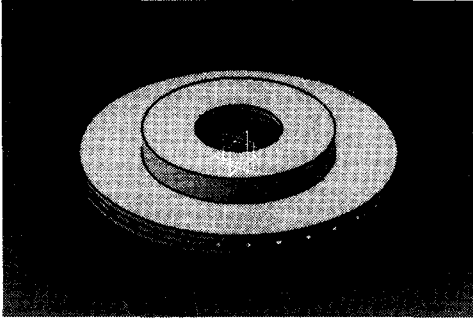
(b) 3D model of the ventilated brake disc having helical grooved vents
